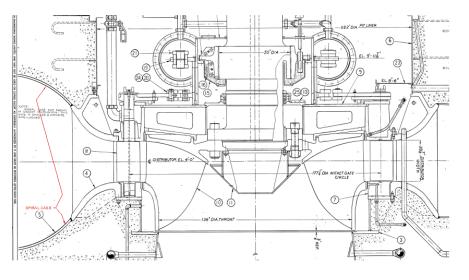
Spiral Case, OEM Turbine Cross-Sectional View
